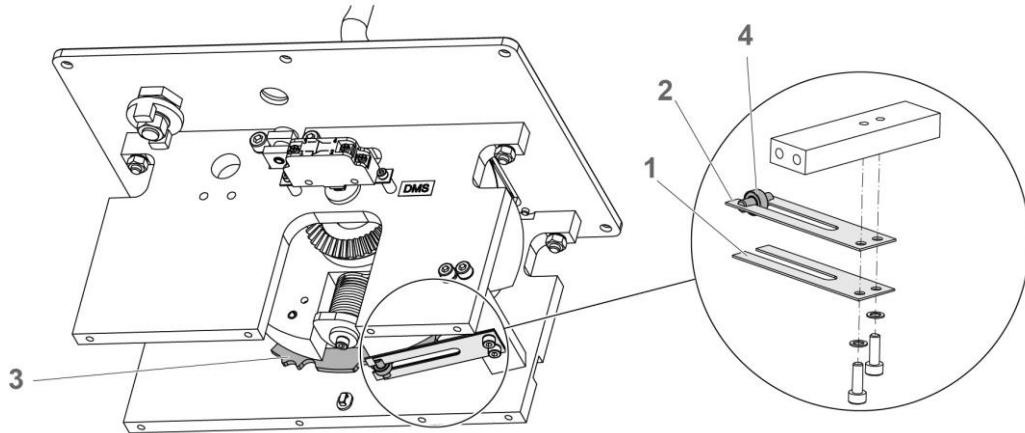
Exchange Wear and Tear Parts and Detent Mechanism
